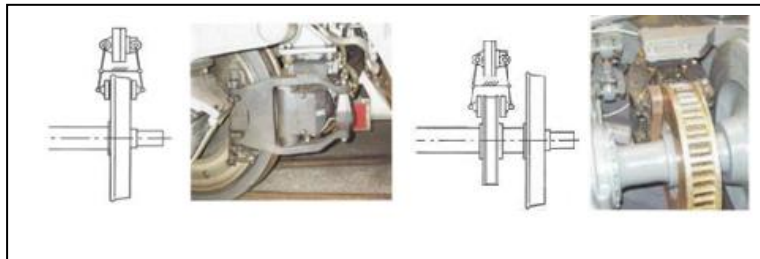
This figure shows a typical wheel mounted disc brake (left) and a typical axle mounted disc brake (right). (Inspired by Gfatter et al., 2007.)
